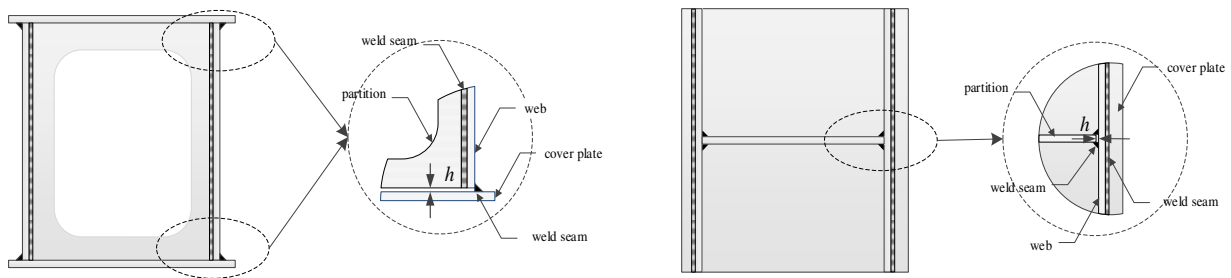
Schematic diagram of welding and assembly of crane box girder.
